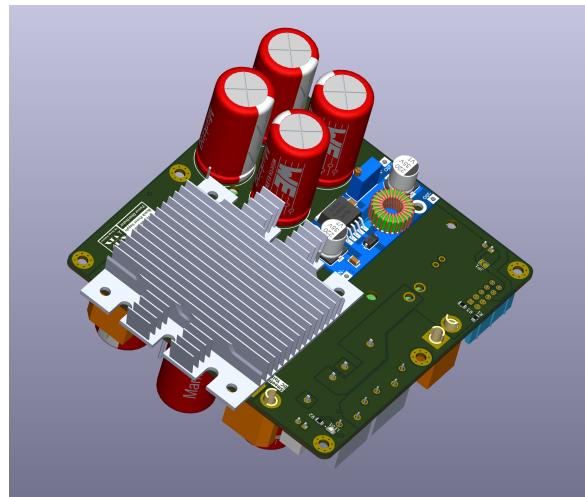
Power Distributor PCB 3D View - Side View 02
